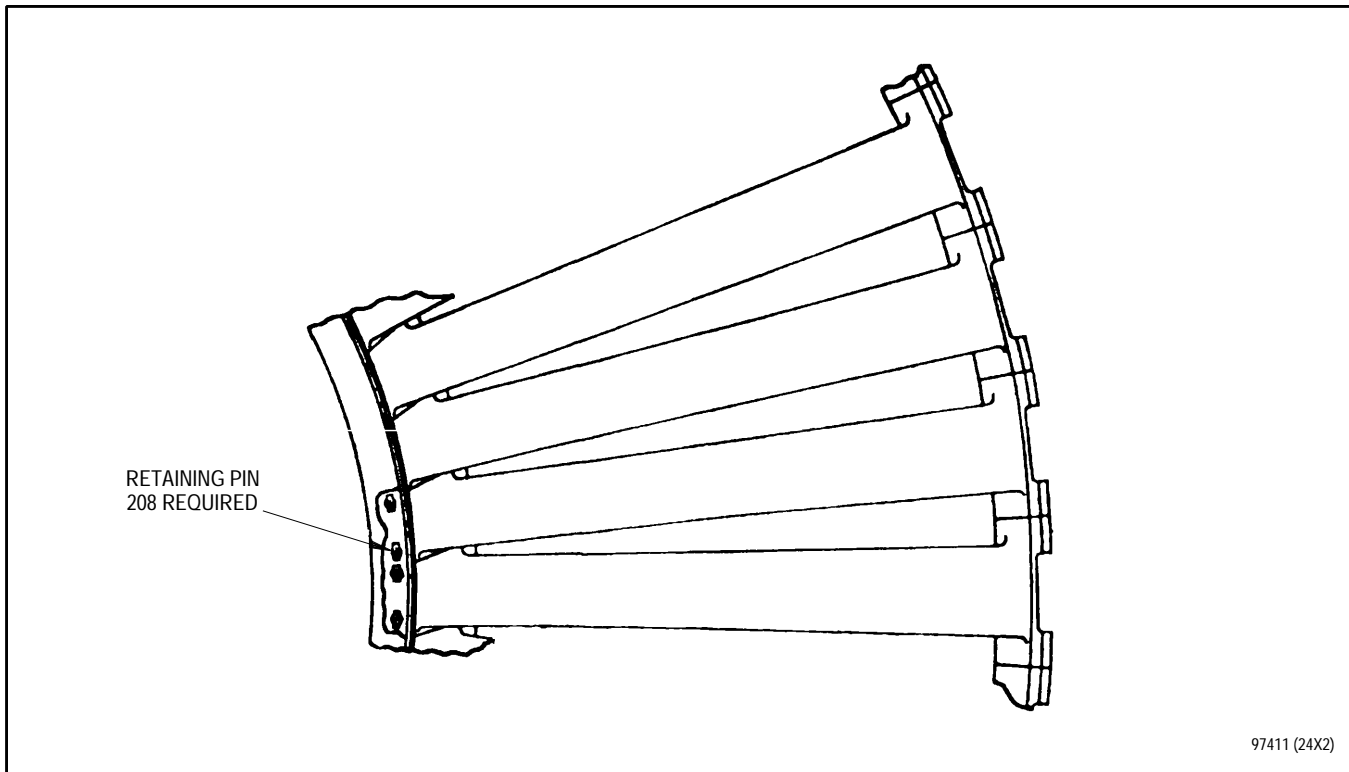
First Stage Compressor Stator Assembly - Stator Vane Retaining Pin Installation
